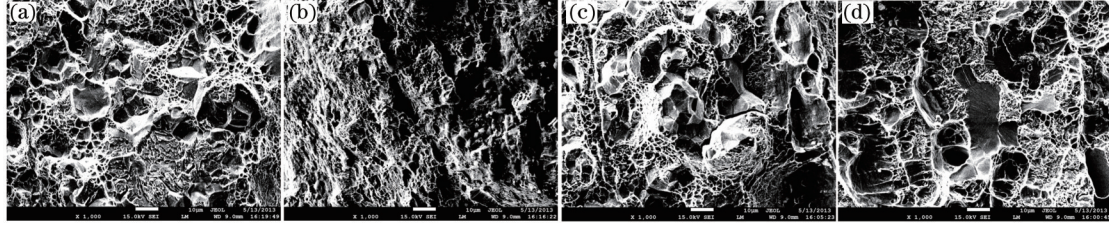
SEM pictures of the tensile fracture. (a) 900 W; (b) 1100 W; (c) 1300 W; (d) 1500 W
